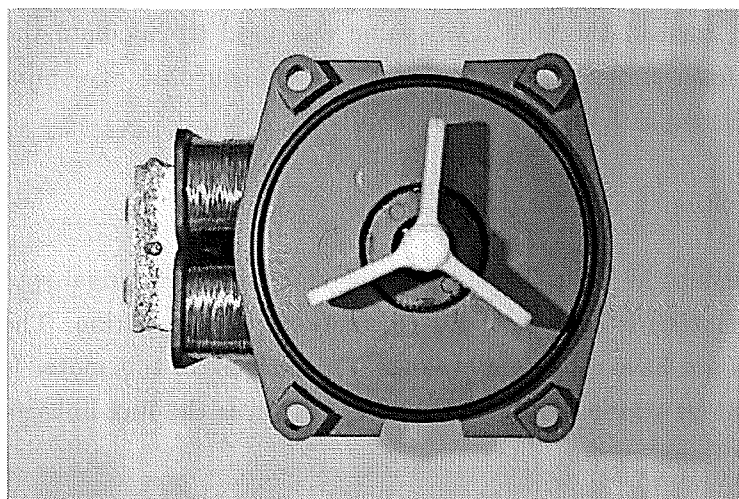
Assembled rotor housing (viewed from impeller end).
